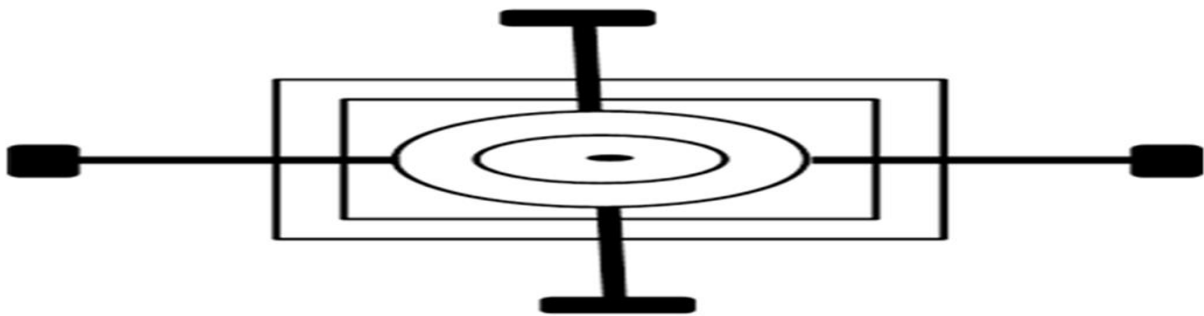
Cross sectional view of Cross head and the centering bolts
